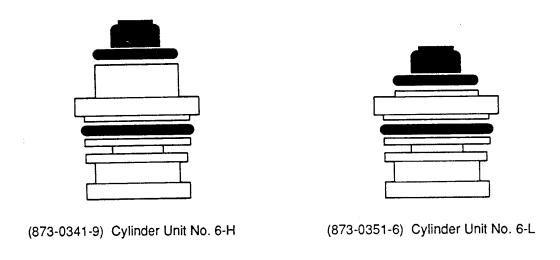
Drawing of Cylinder Unit No.6 (H and L)
